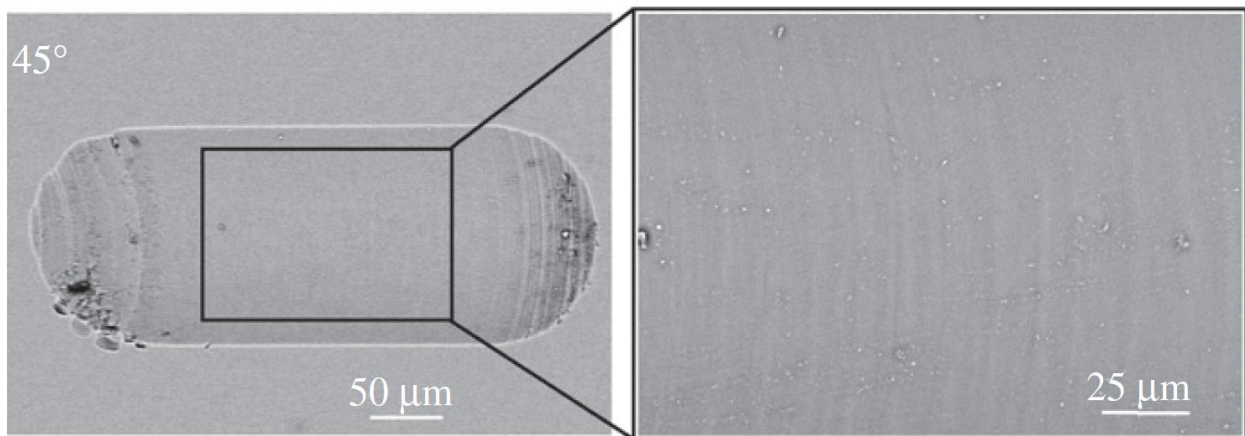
Groove cutting of ductile mode milling (Foy et al., 2009).
